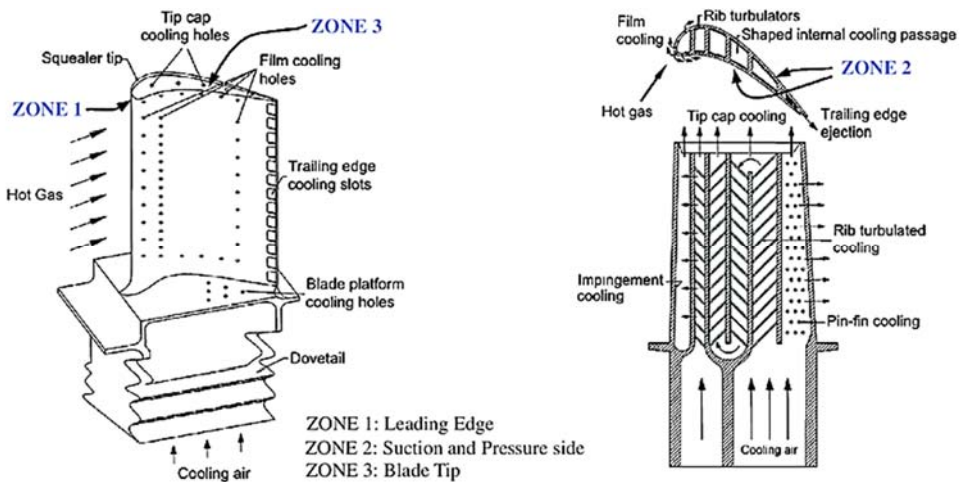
High pressure turbine rotor blade for GE CF6 engine [8].
